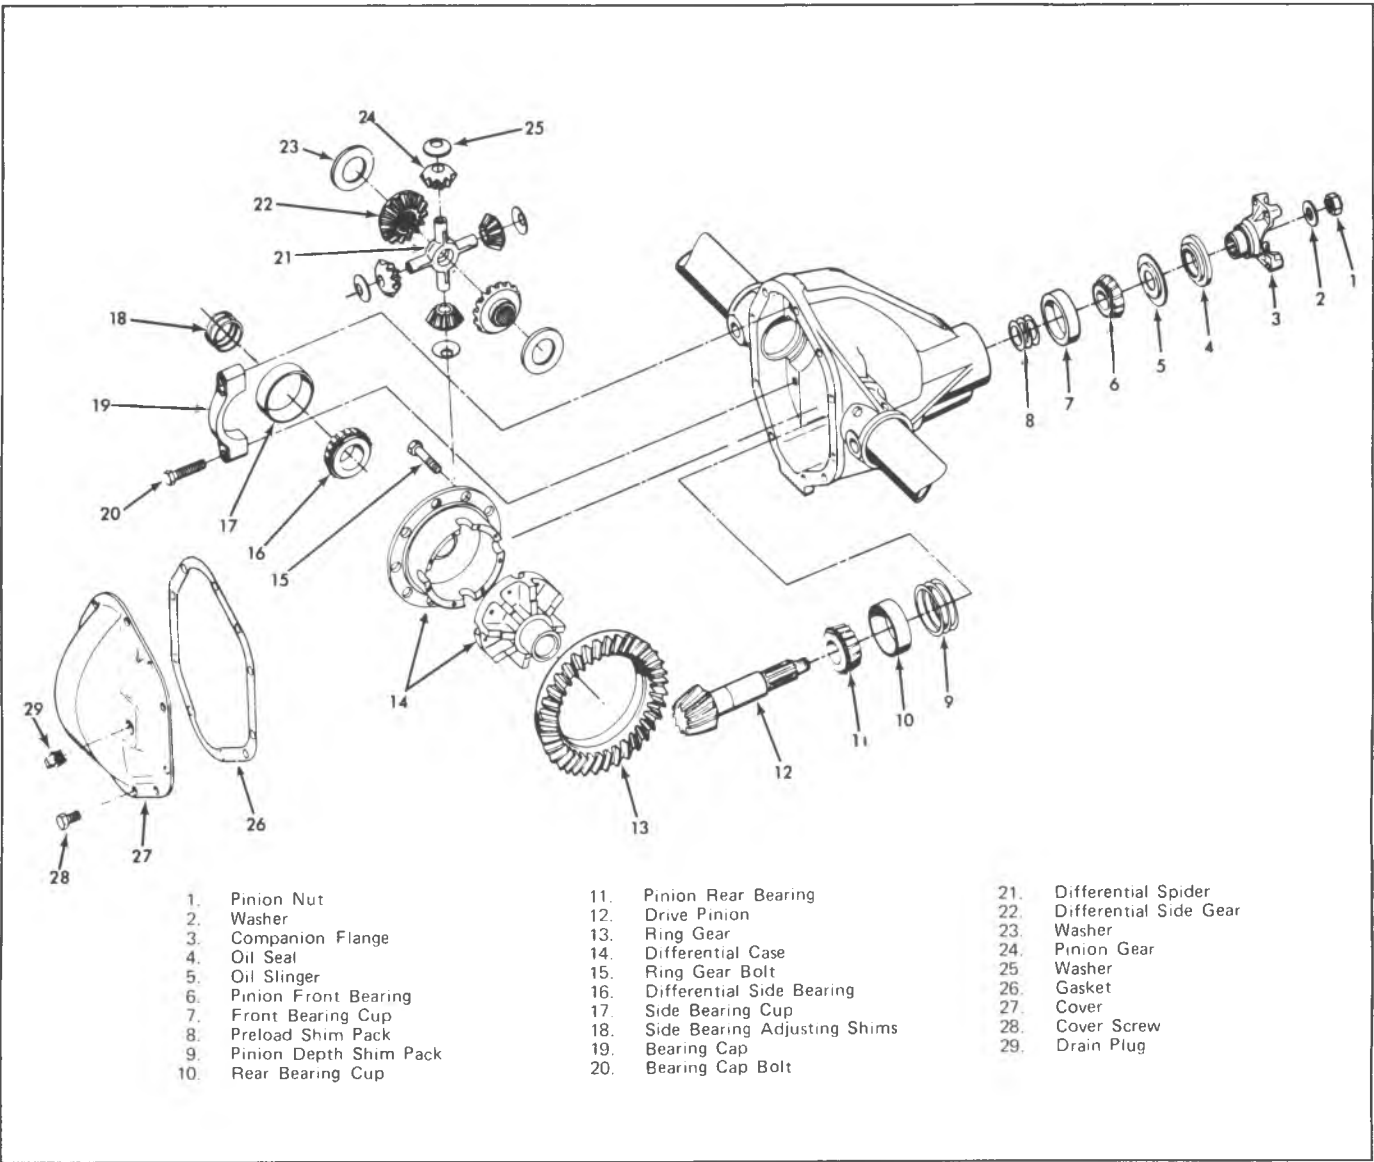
B-6--Dana 10-1/2" Ring Gear Axle Exploded View
